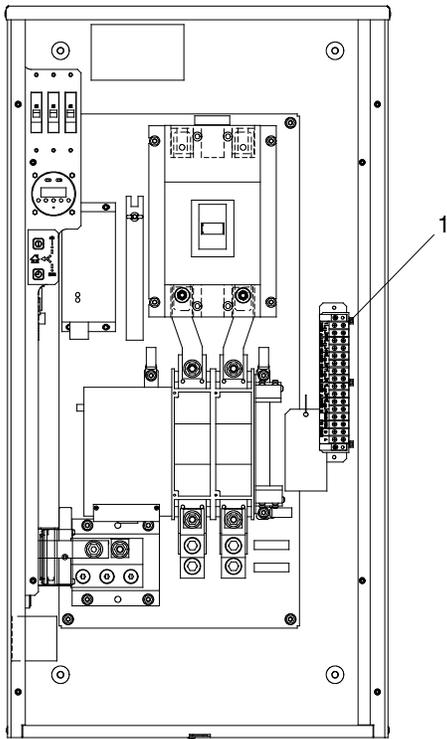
Recommended Kit Mounting Locations, 100–200 Amp Model RDT Transfer Switches without Mounting Holes or Hardware
